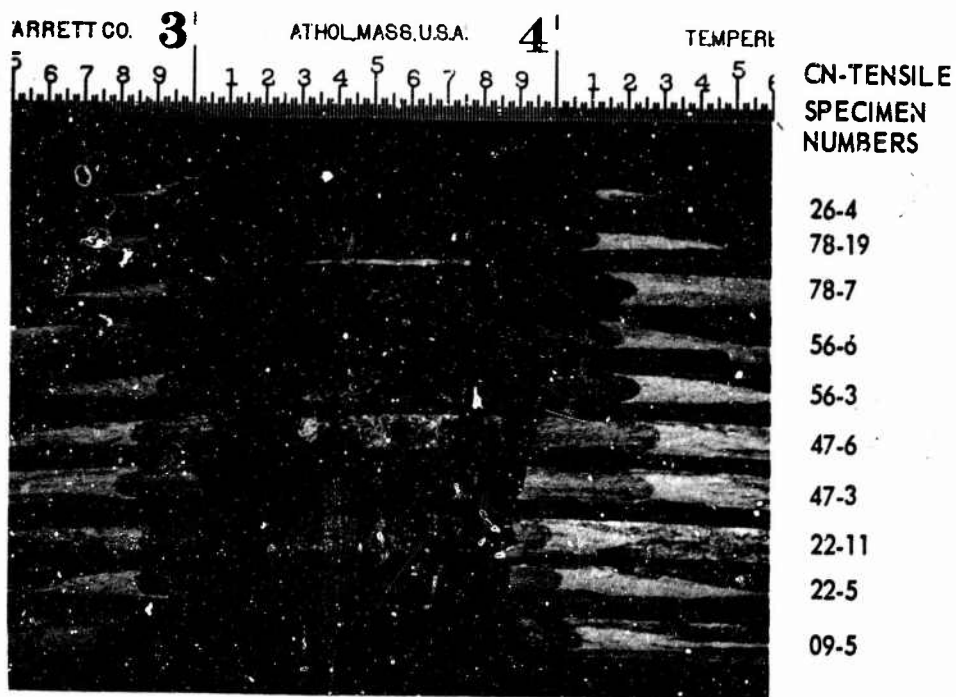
Heat-Tinted CN-Tensile Fracture Surfaces Showing Crack Length at Maximum Load
